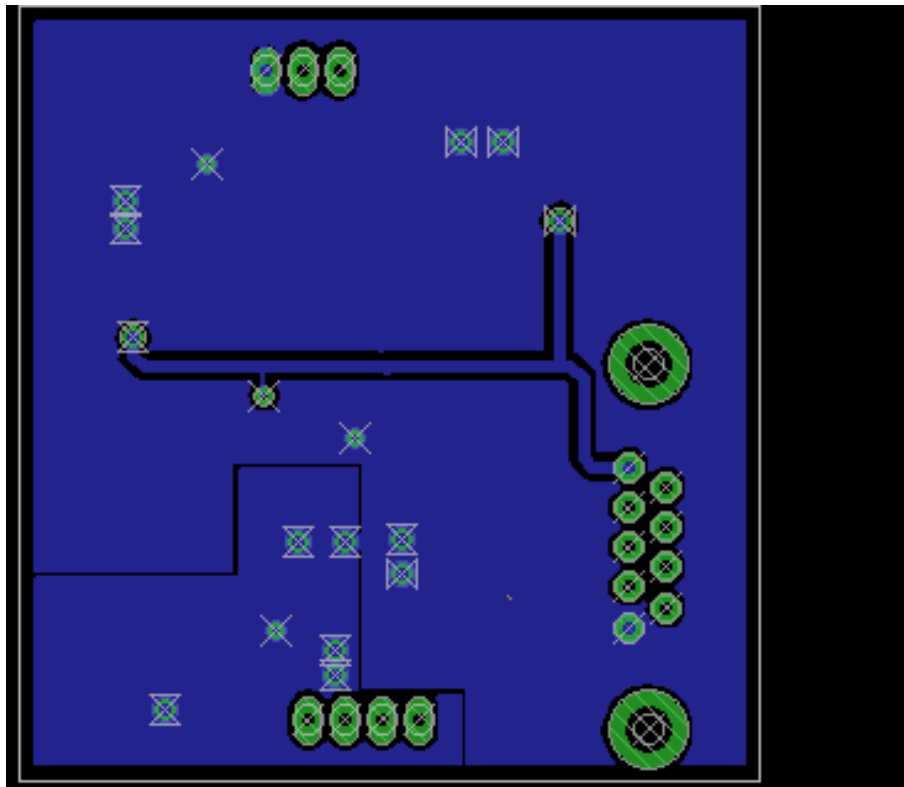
Analog acquisition printed circuit board layout - Bottom view
